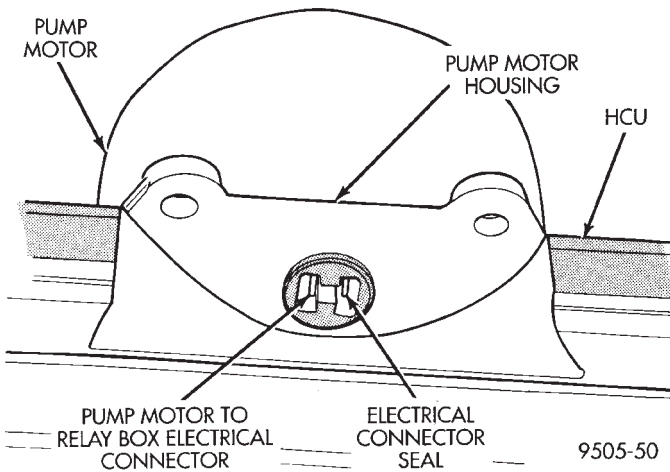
Pump Motor To Relay Box Electrical Connection Seal
